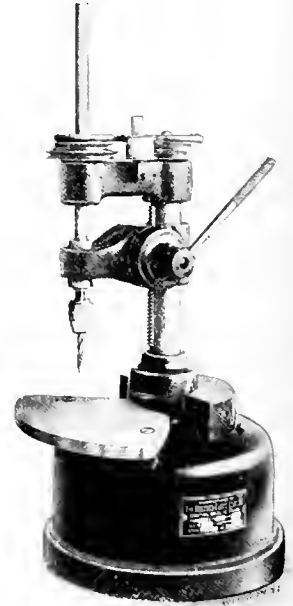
Rear View of the Newton Cylinder Boring Machine
